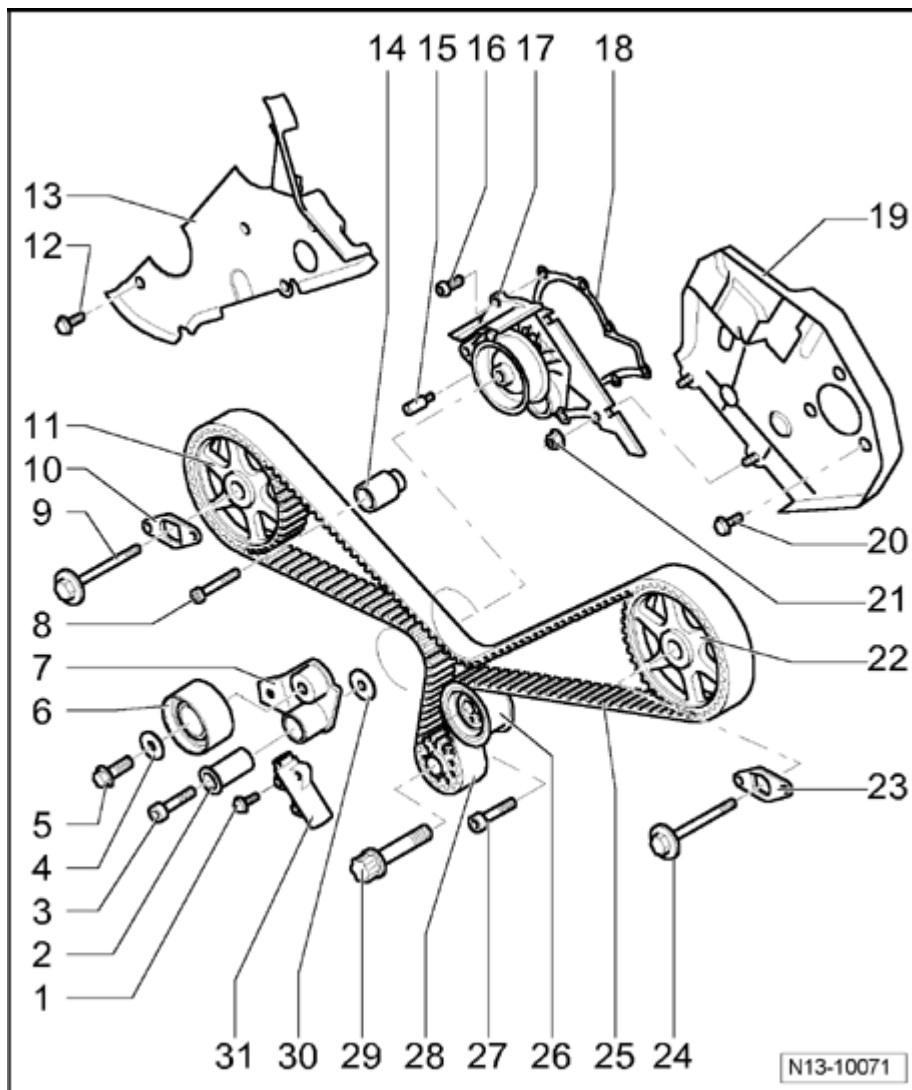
Part I - Toothed Belt Drive, Assembly Overview
